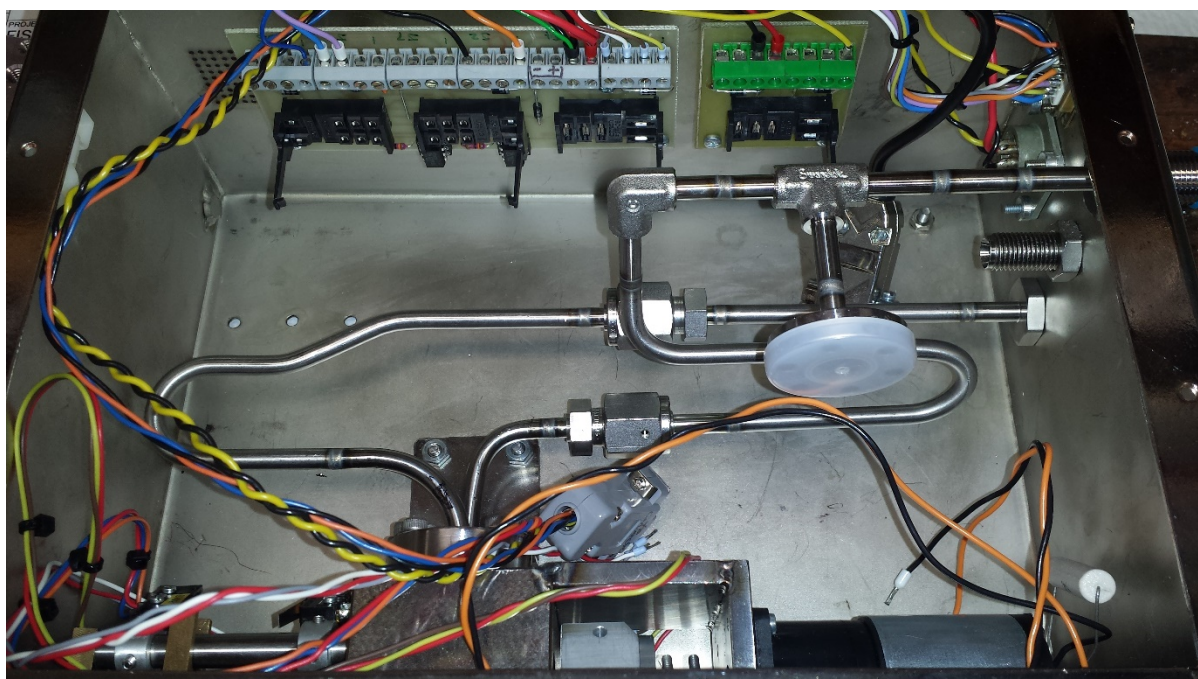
New welded and VCR connections inside gas stripper control box
